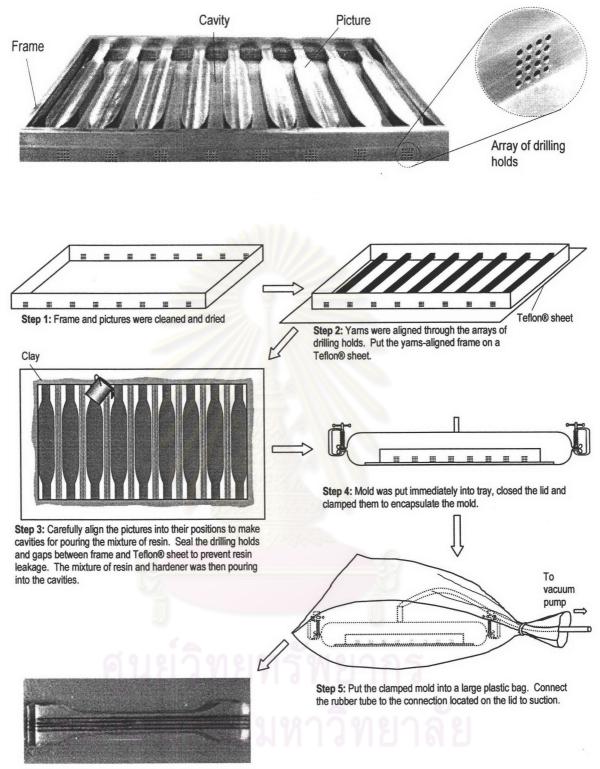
CAD-designed and 3D illustrated of the pictures-frame casting mold
